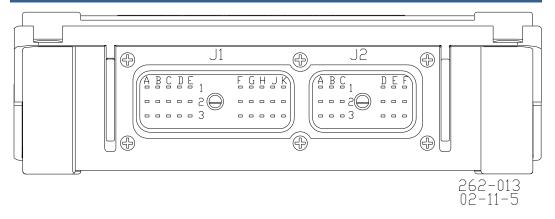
Driver Connector Pin Locations (viewed looking at the driver housing)
